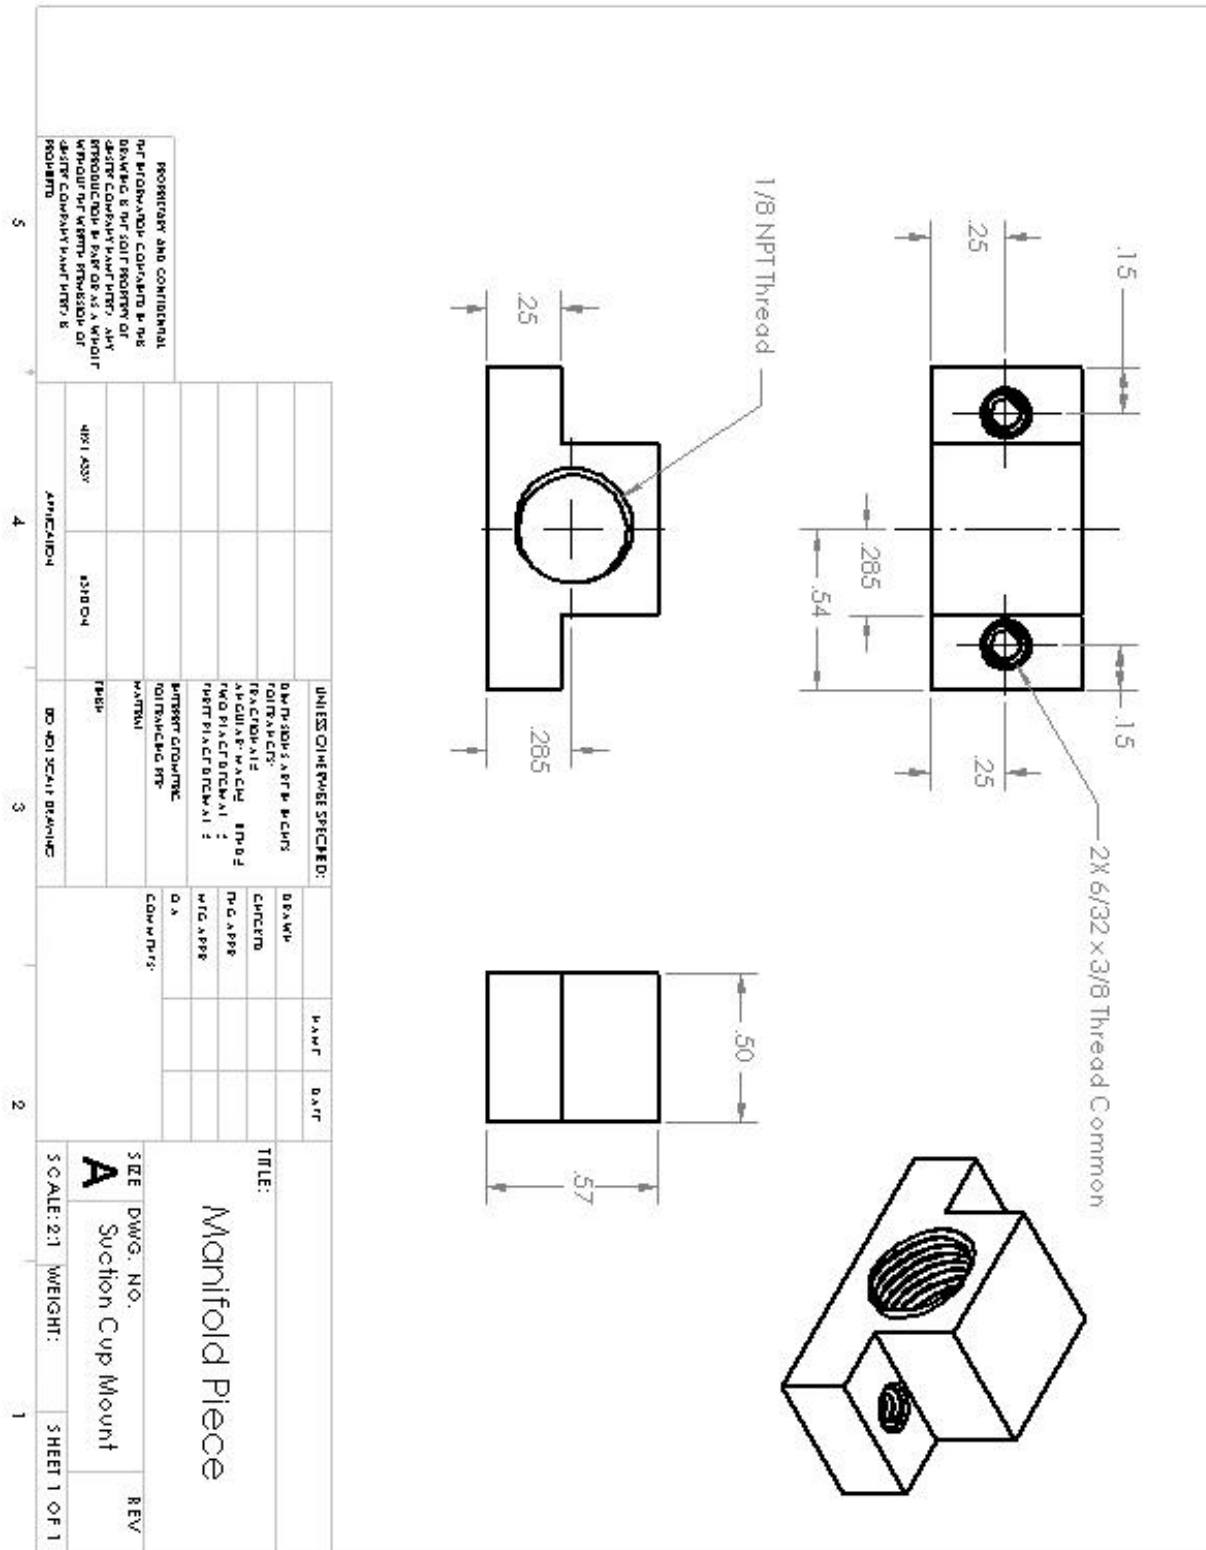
Manifold Piece which connects the sucker fitting to the mounting piece for the Folder Holding System which only uses one servo arm assembly.
